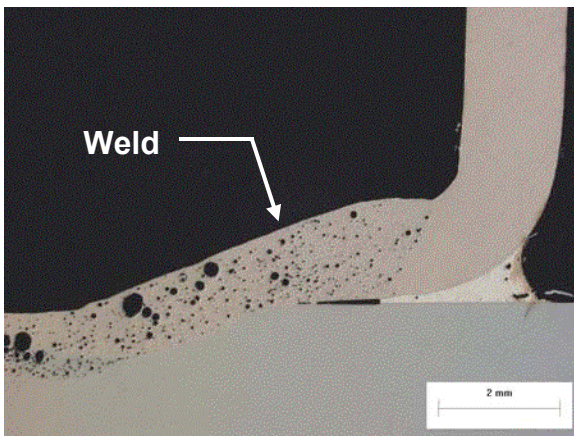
Assembly #3 Braze Joint Voids with Porosity in Adjacent Weld
